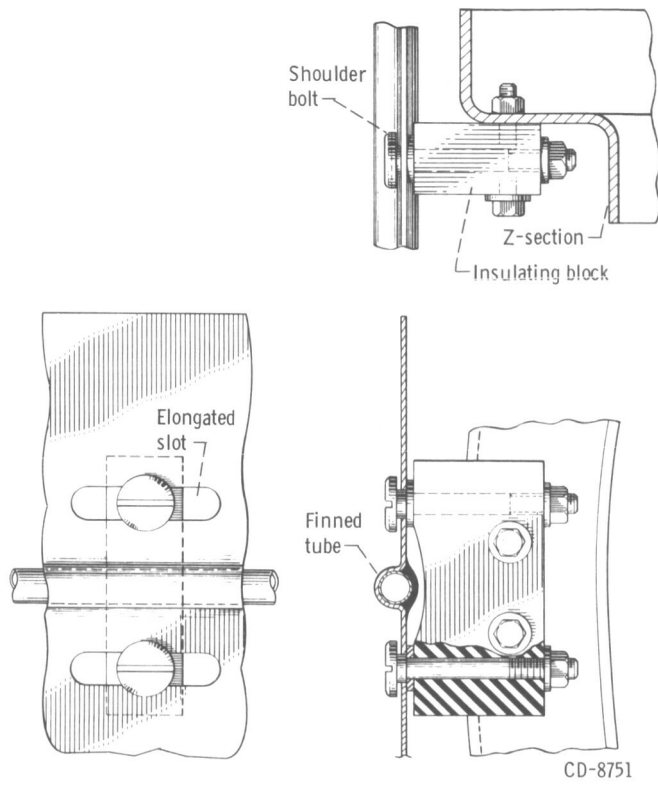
Detail of finned-tube attachment to Z-shield circular frame.
